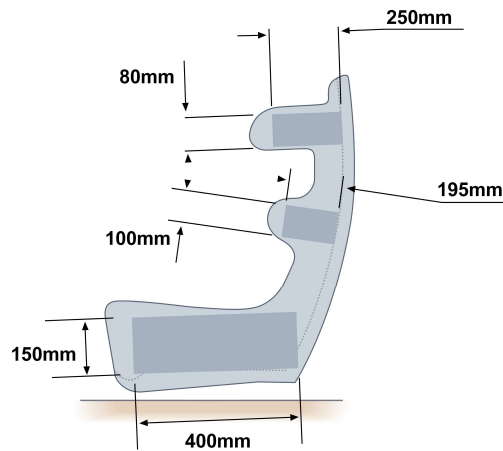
Minimum dimensions for head, shoulder and pelvis side support
